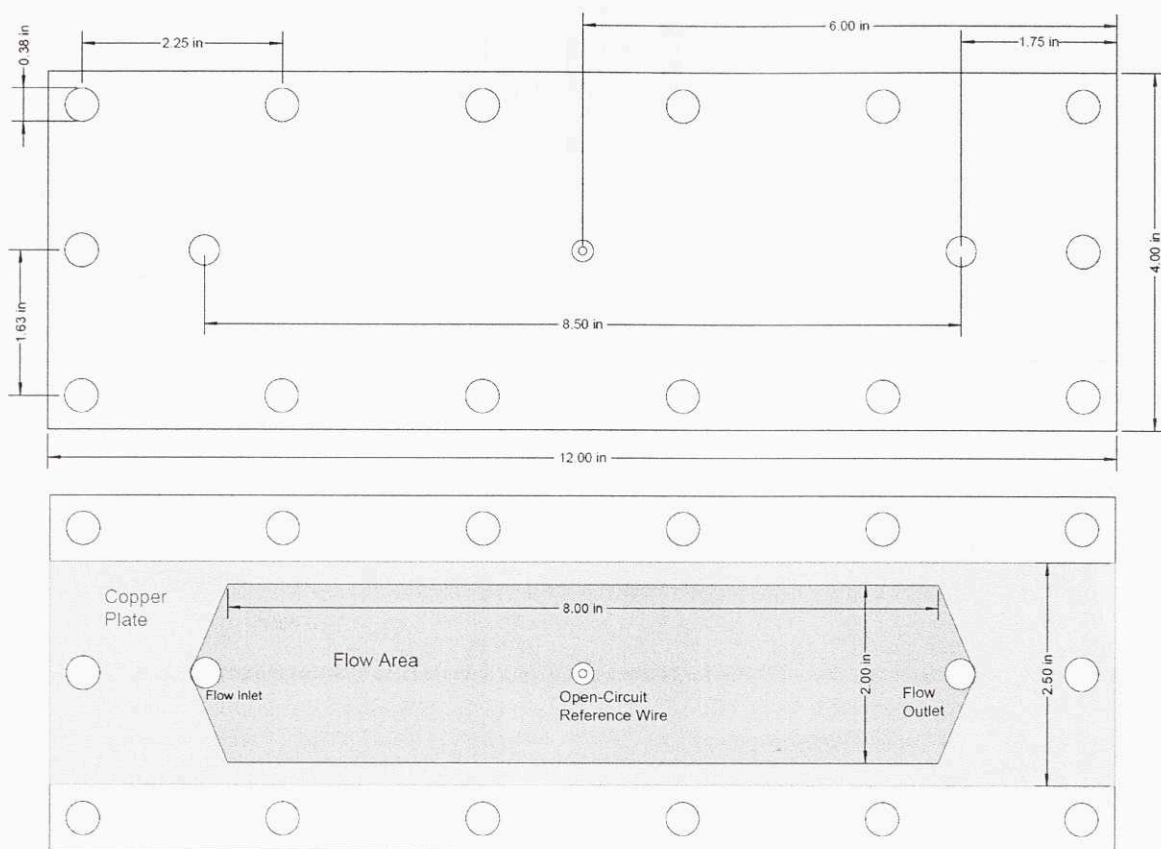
(Top) Schematic diagram of the aluminum chassis pieces for the EMAR 4 electrochemical flow cell. (Bottom) Chassis piece diagram with the copper plate and flow area highlighted. The flow area is created from a gasket (not shown) placed on top of the copper plate with a cutout in the shape of the flow area.
